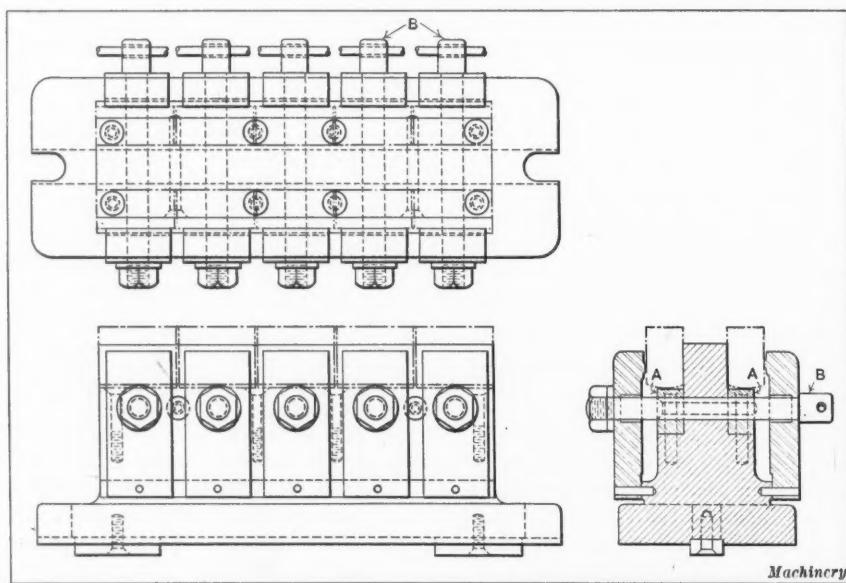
Milling Fixture for milling the 120-degree V-grooves in the Teeth of the Jaws
